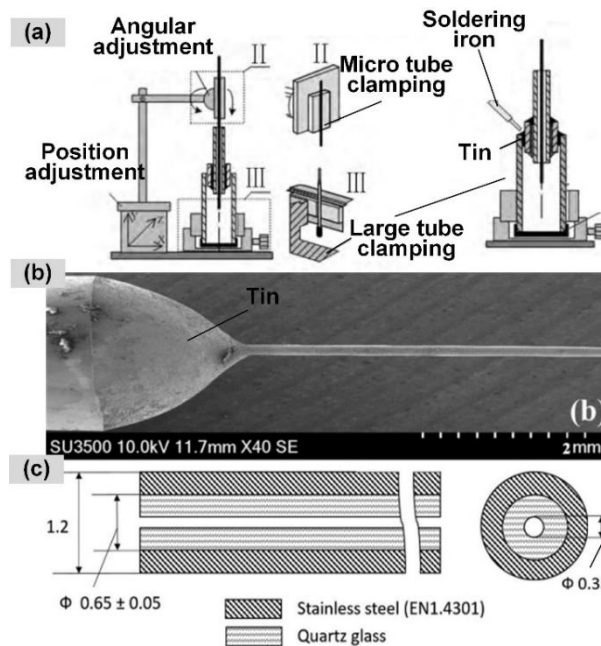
(a) Fabrication procedure for the micro-tools using a welding method (Kong et al., 2015); (b) A micro-tubular tool (Saxena et al., 2020c); (c) Sketch of the hybrid tool for L-ECM processes (Saxena et al., 2020b).
